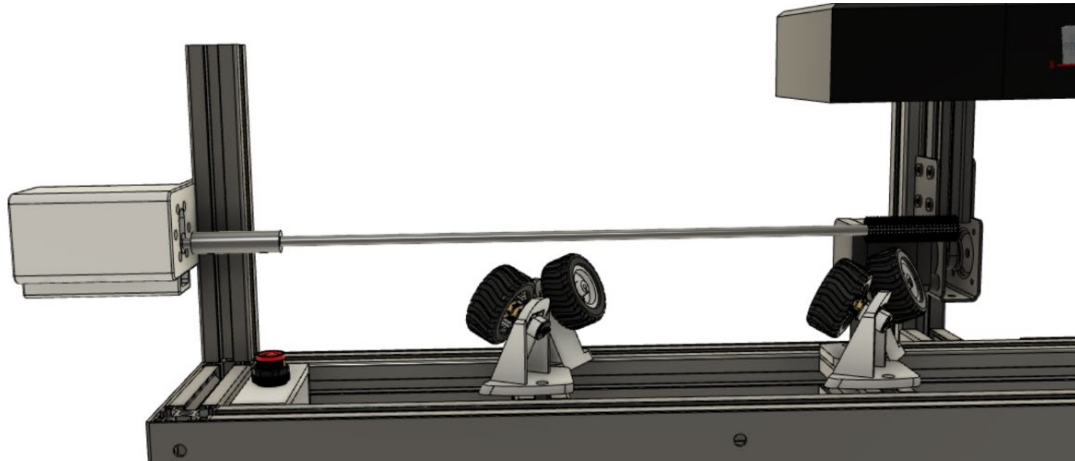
Design layout for internal pipe cleaning system, highlighting the arrangement of components
